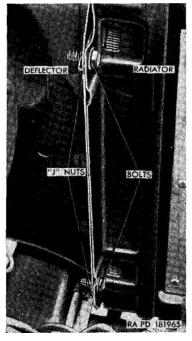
(Added) Radiator to guard panel J nuts M170-installed.
